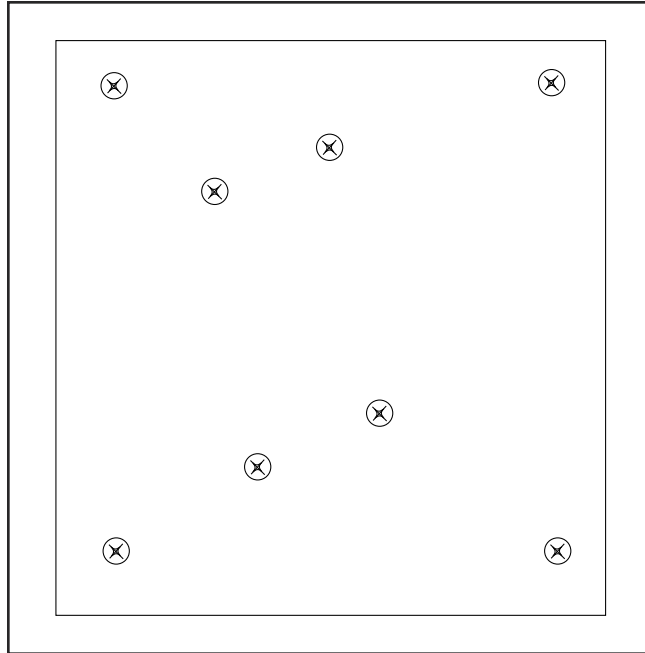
Control Board Mounting Locations may vary with different Code Machines.
